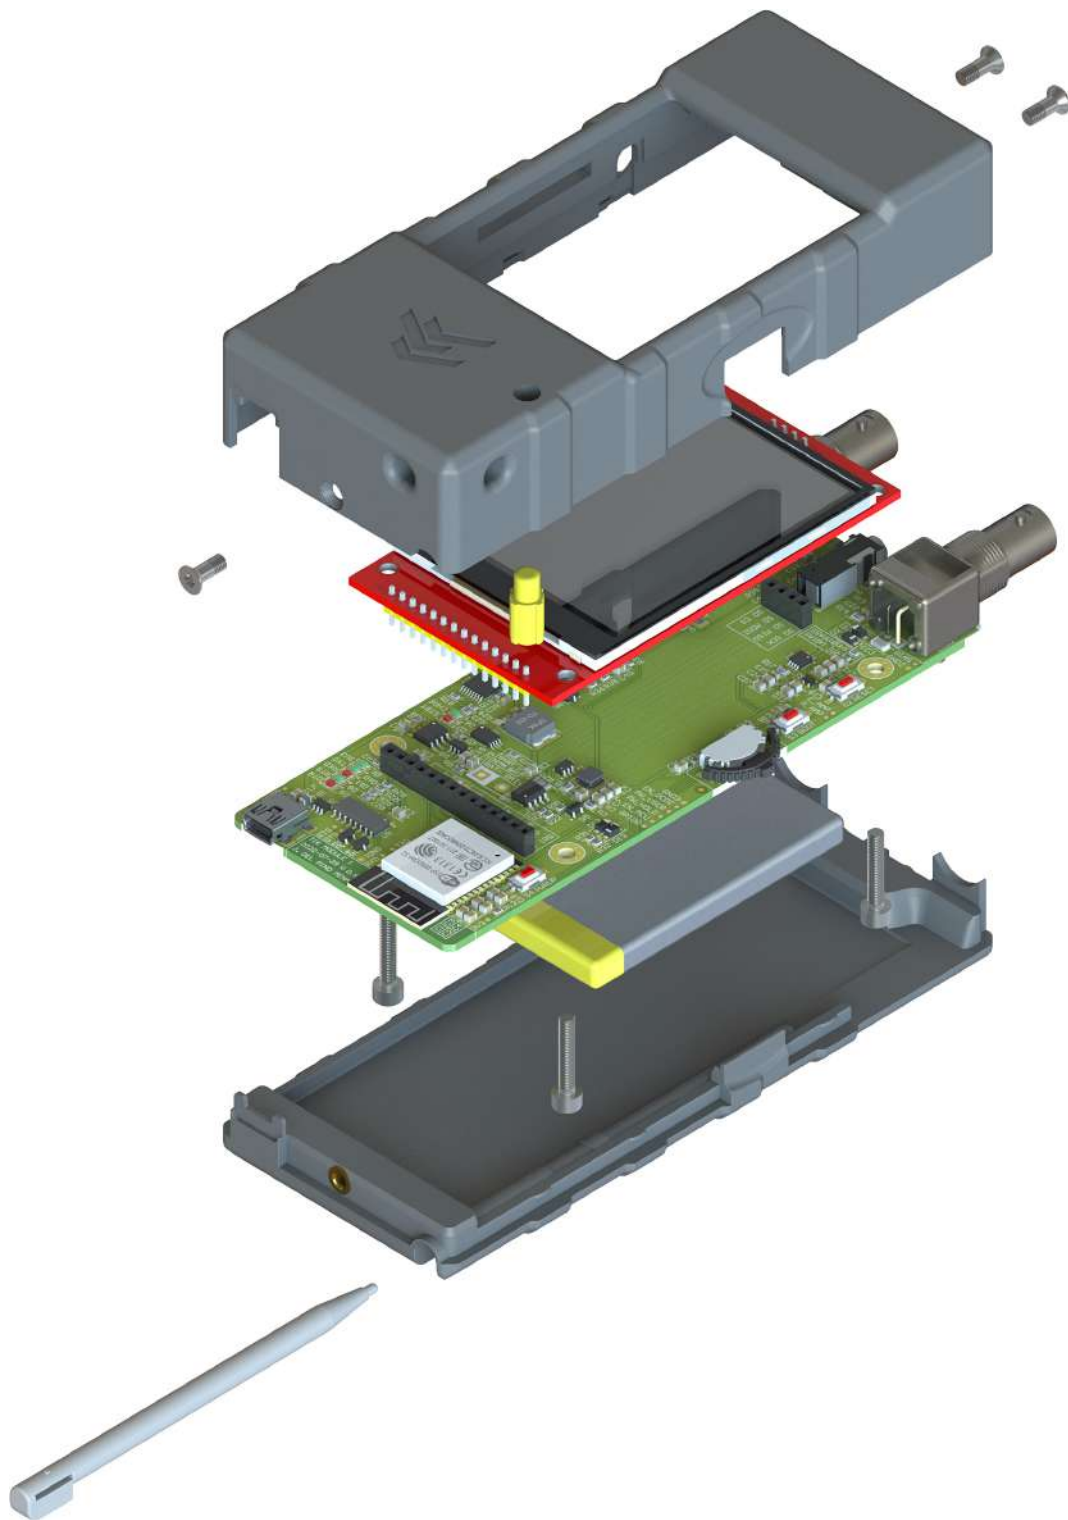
Top-side exploded view render of the complete assembly.
